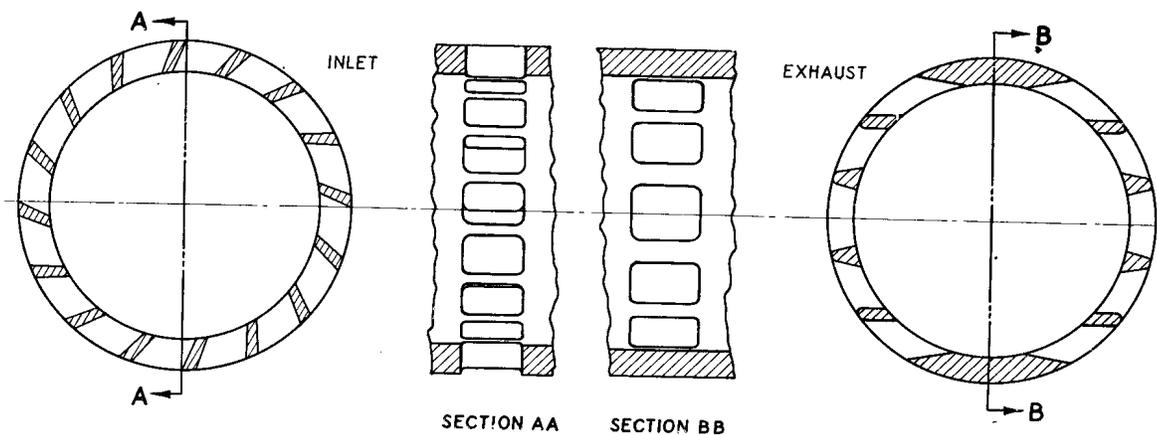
Ports of a Typical Opposed-Piston Engine.
